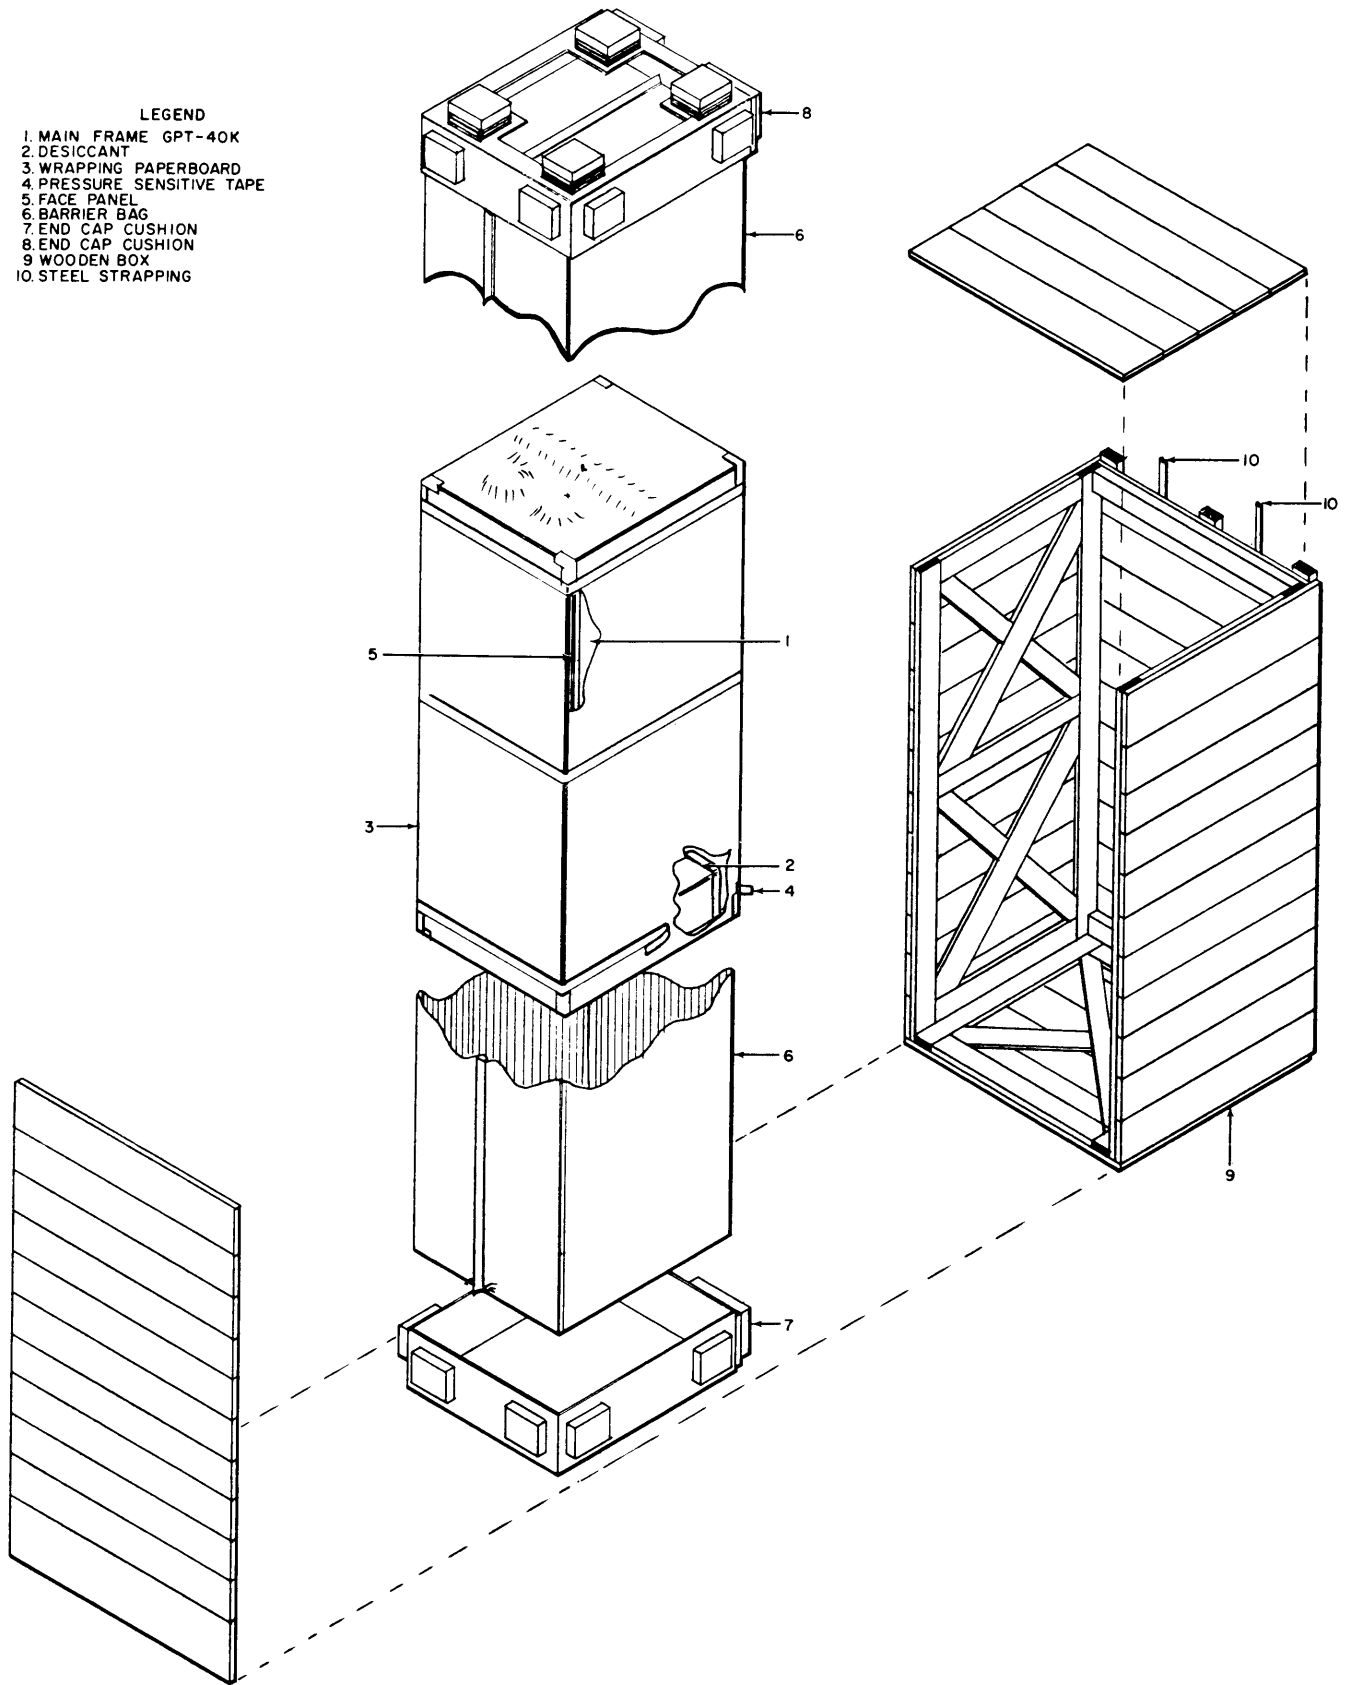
Typical Equipment Packaging (Sheet 3 of 4).
